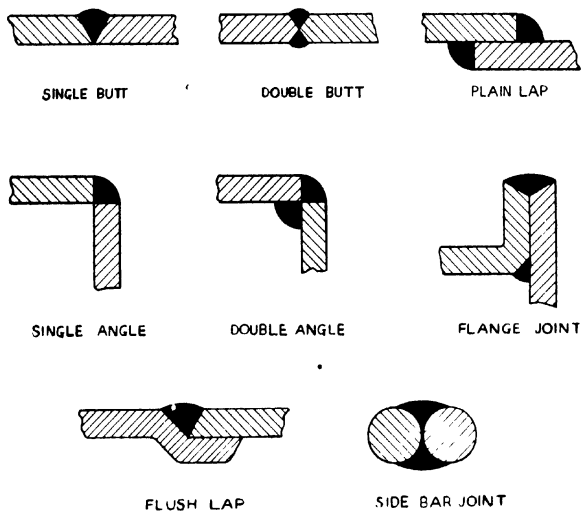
SHOWING TYPES OF ELECTRIC WELDS.
